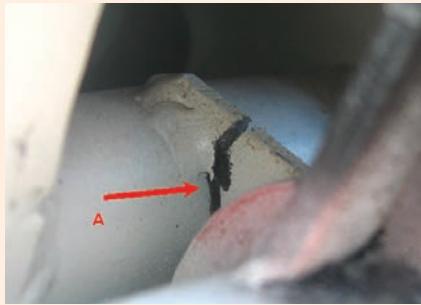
Left-side view. (Left is forward) Elevator bracket still in place with elevator bearing and control horn to the right. Notice where the bracket separated from the frame in relation to where the weld ends. (A)
